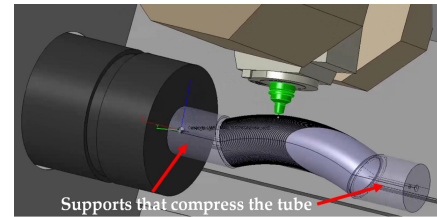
Machining of the former's groove where the conductor is inserted (Courtesy of Karol Sciborn).
